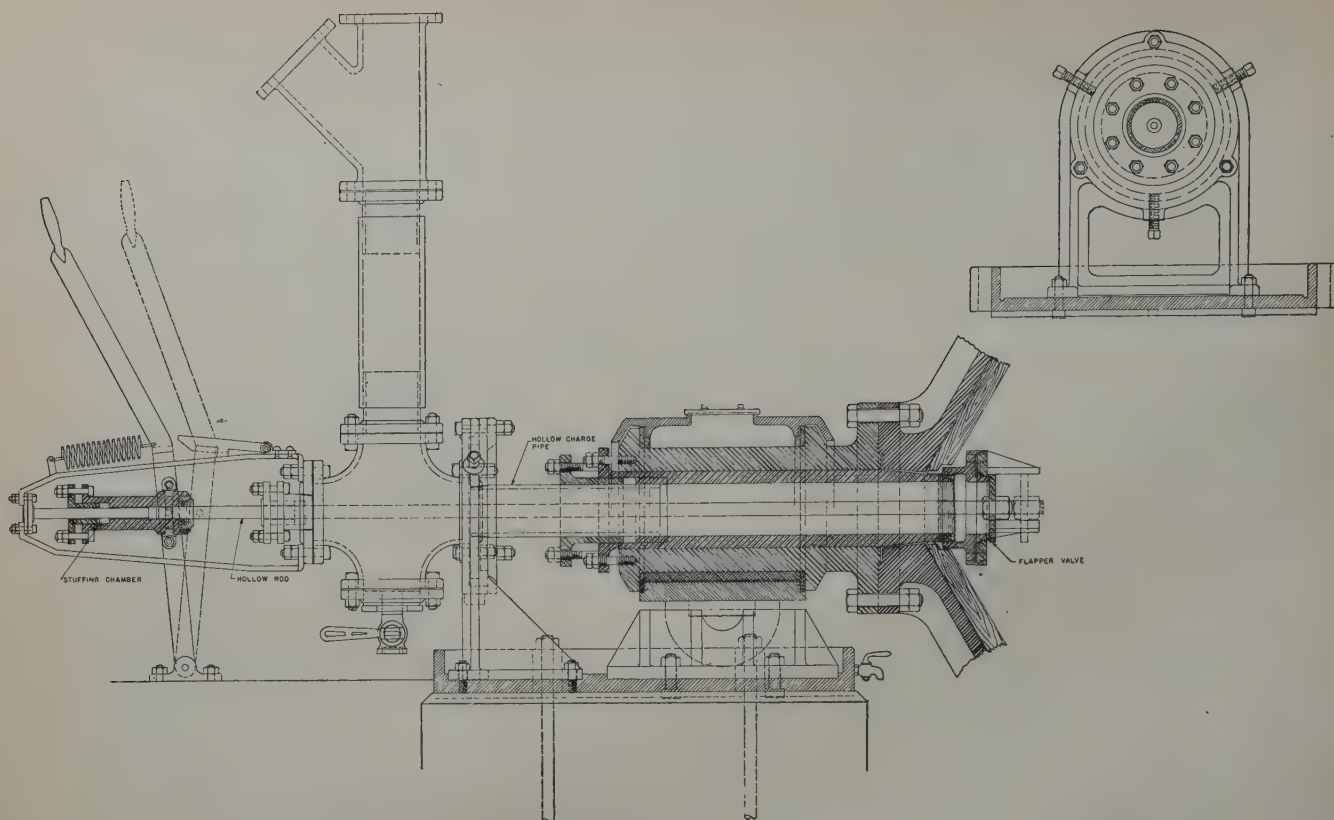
Feed inlet valve mechanism and supporting trunnion at head end of filter.
